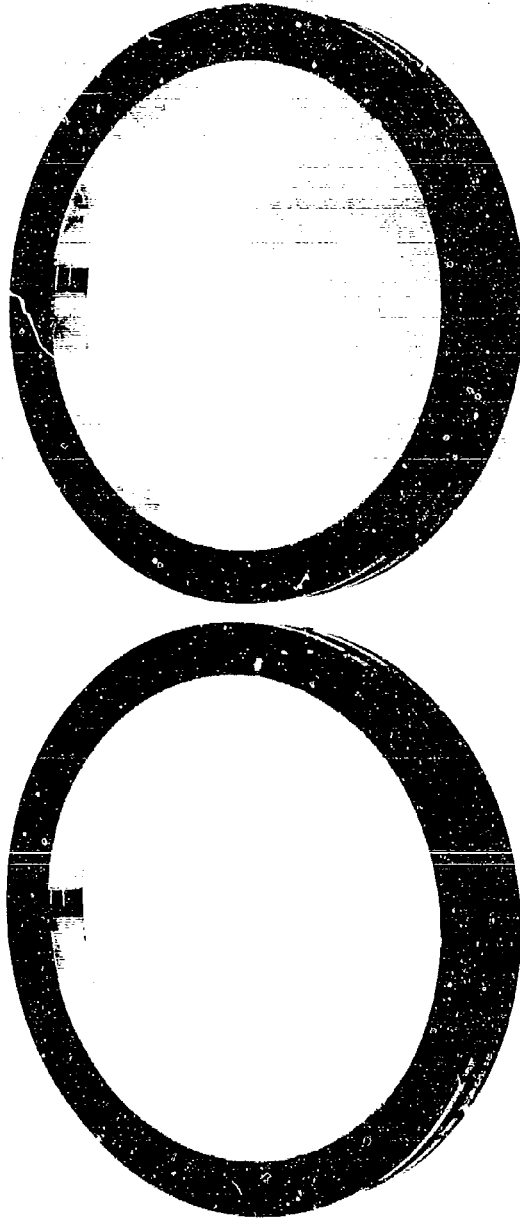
JTF17A-20 No. 4 Compartment Carbon Seal Assemblies After Rig Test
